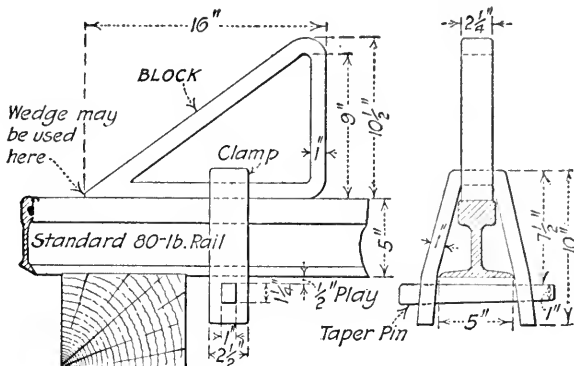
ASSEMBLED PARTS OF STEAM-SHOVEL BLOCK.
